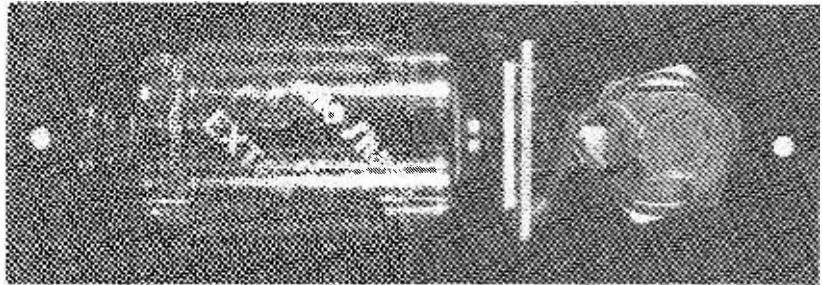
THE CIRCUIT SHOULD be assembled on a piece of anodized aluminum.
